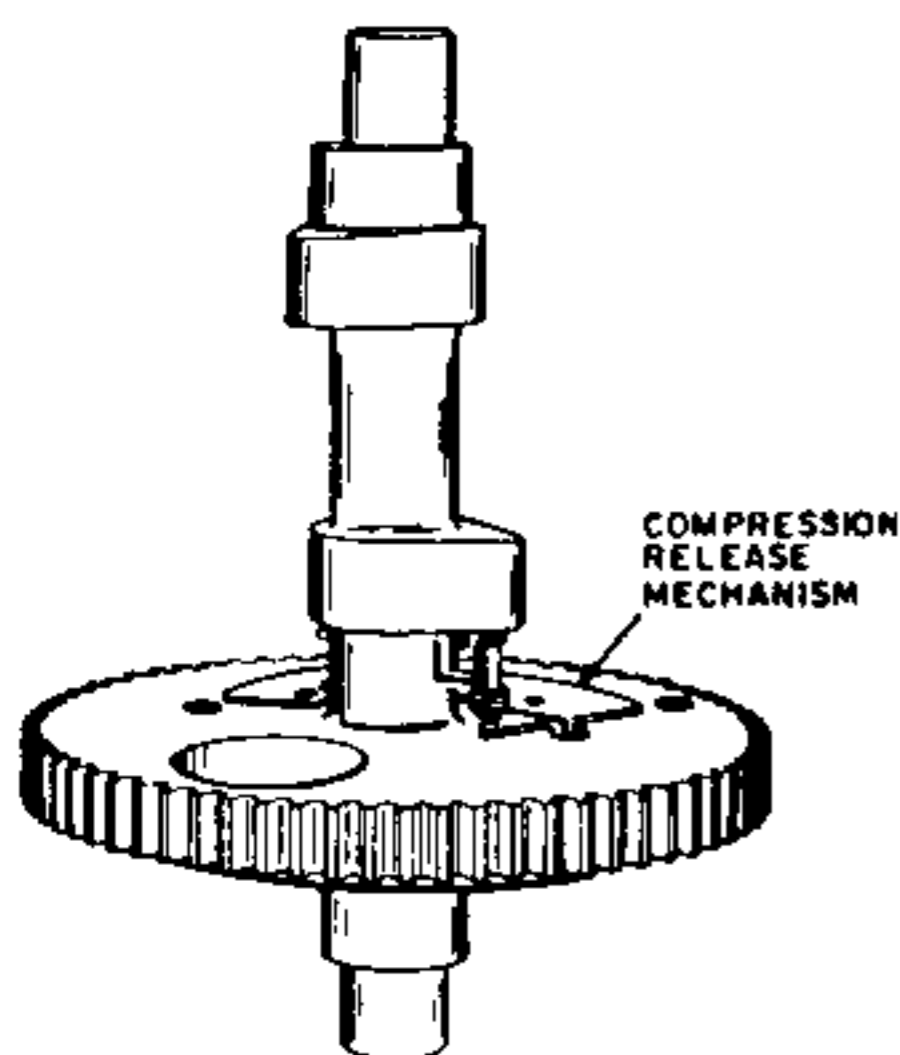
View of Insta-matic Ezee-Start compression release camshaft assembly.
